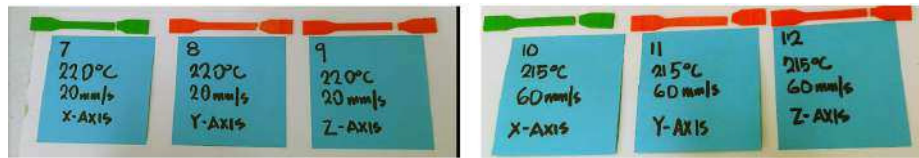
Specimen A7 to A12 after evaluation on the Q test machine.
